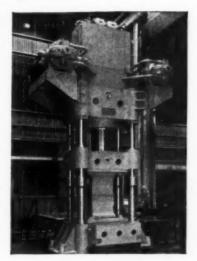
A 1,000-ton self-contained all-hydraulic press designed for flat die forging operations. This press has a maximum ram travel of 42°, and a maximum pressure can be obtained anywhere within the limits of this travel. The press is equipped with two radial piston type, hydraulic pressure generators, each driven by a 200 hp electric motor.
